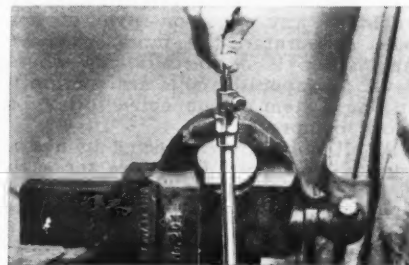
Then peen inner tube over "T" connector with rod provided for this purpose.
